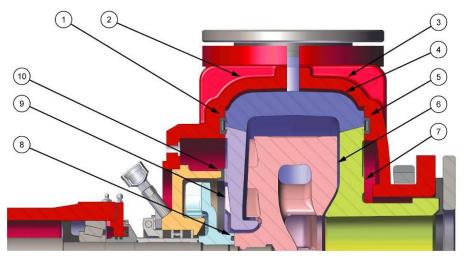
Three Part Metal. Fitting Frame Plate Liner Insert, Volute Liner, Seal Rings, Volute Liner Seals, Impeller O-Ring, Impeller and Cover Plate.
